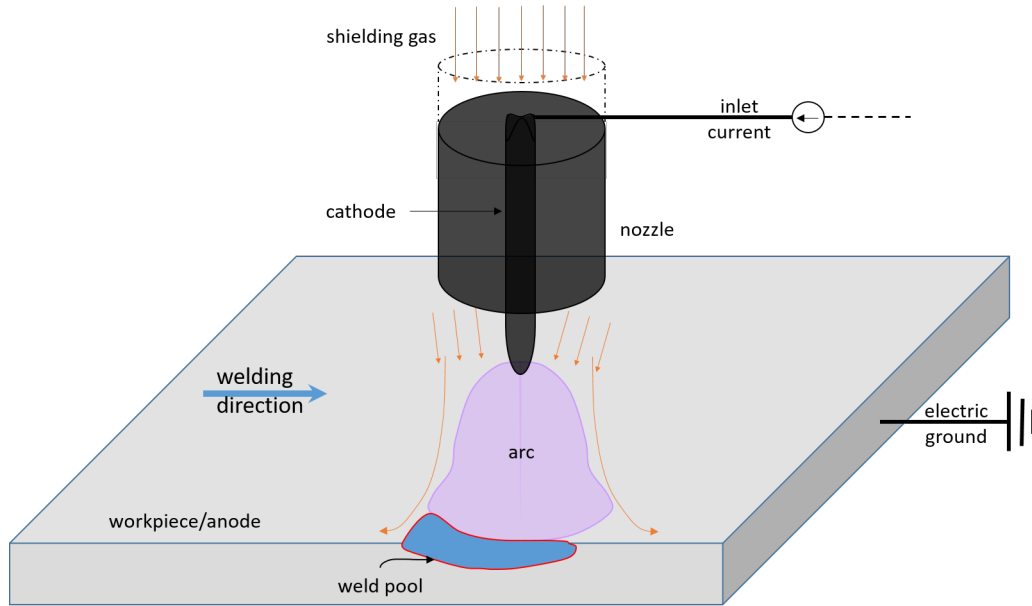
Principal constituents of the TIG welding system.
